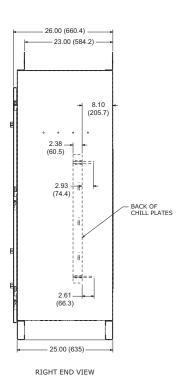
Drive cabinet dimensions: Frame 4, in. (mm)
